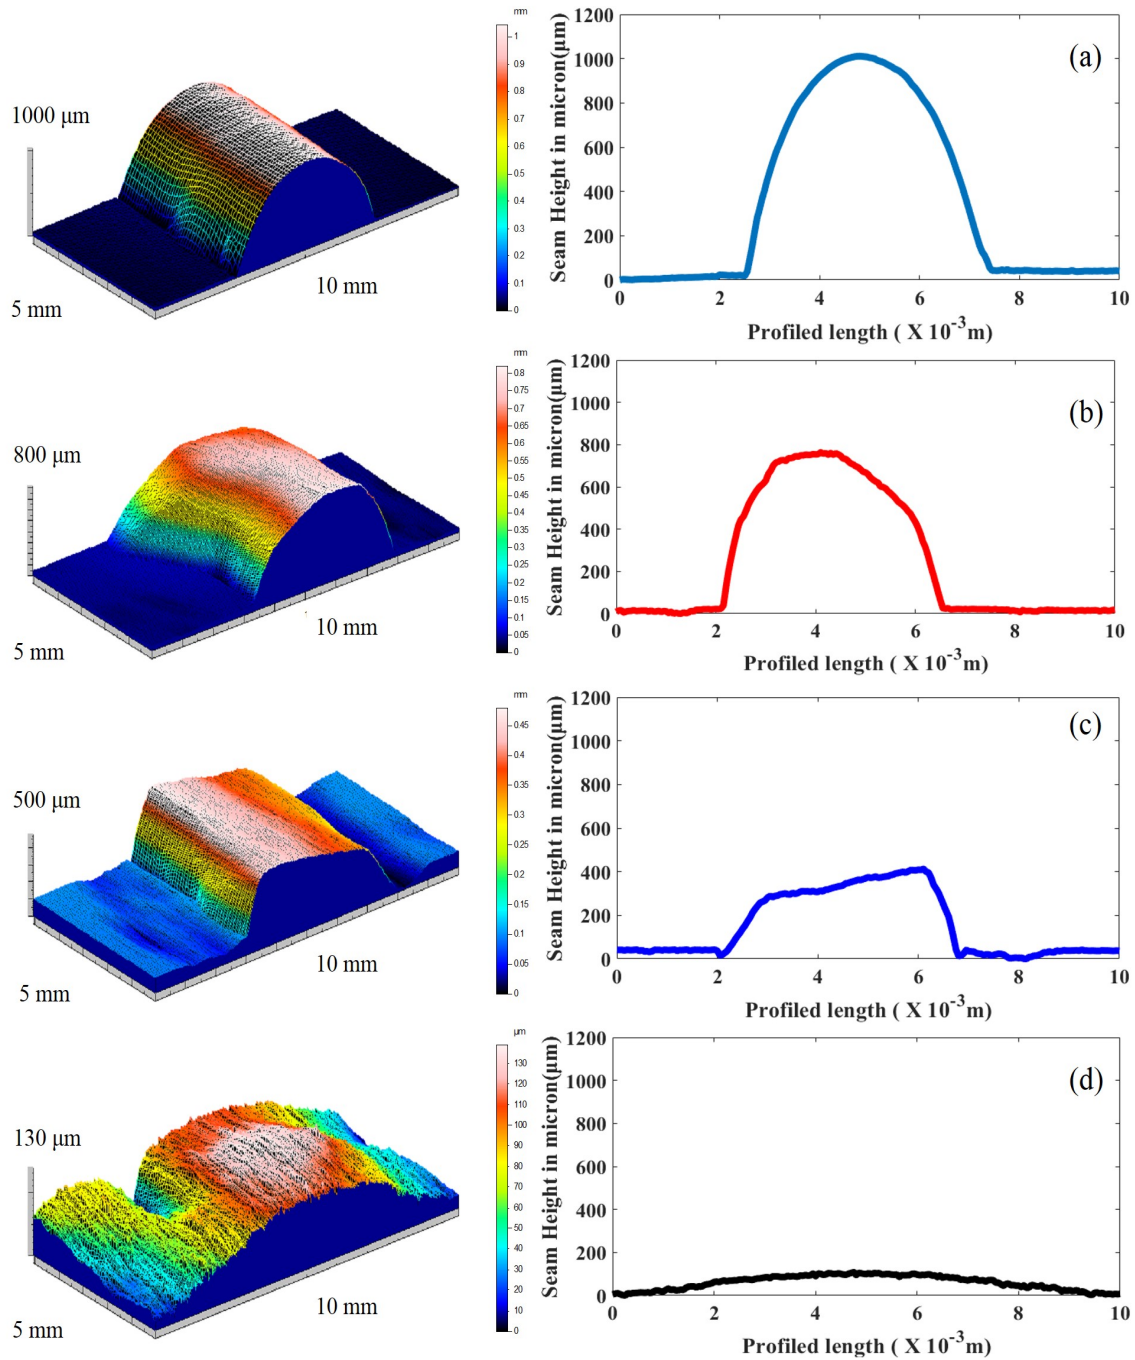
3D and 2D profile depicting weld states during the weld seam removal using belt grinding process.
